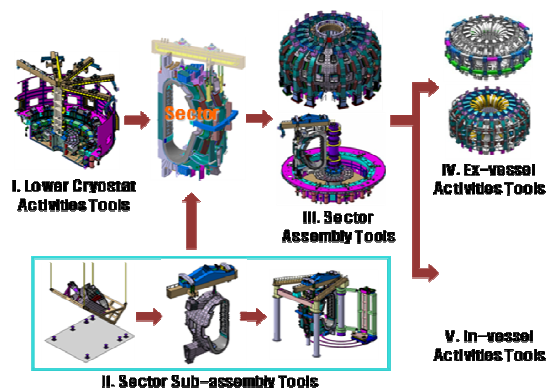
The Overall Assembly Process and Classification of the ITER Tokamak Machine.
